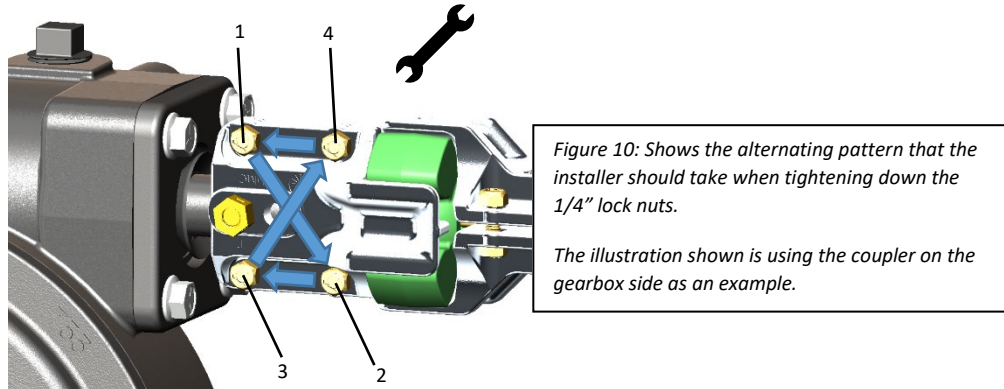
The illustration shown is using the Coupler on the Final Drive Gearbox side as an example.
